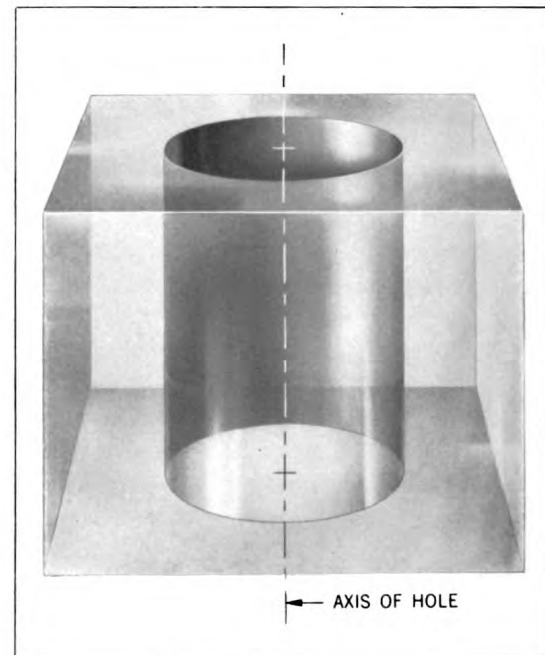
Alignment of axis and geometry of form are part of the problem of hole location.
